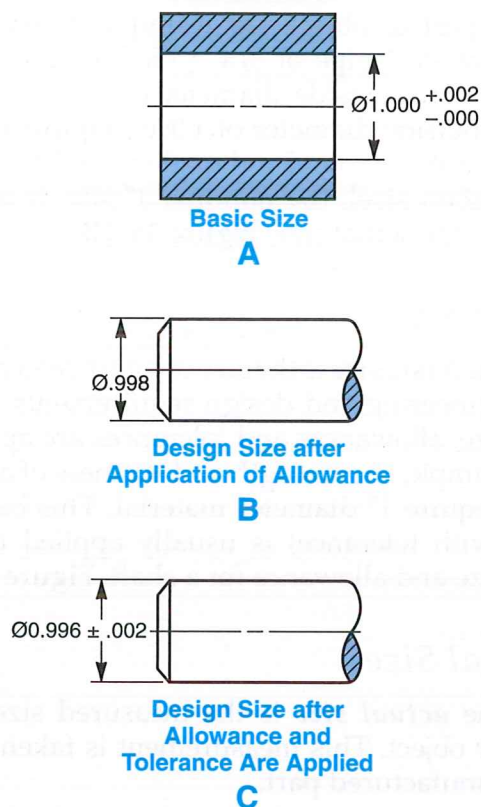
The basic size of a part is determined by engineering and design requirements. A—The basic size of a hole for a shaft design. B—The allowance is the maximum variance allowed in the design size. C—The final design size accounts for the allowance and the tolerance for the designed part.
